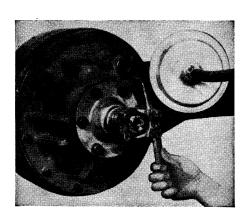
Remove shift diaphragm and bracket assembly. This diaphragm assembly need not be disconnected from the base, but should be fastened up to the frame out of the way
